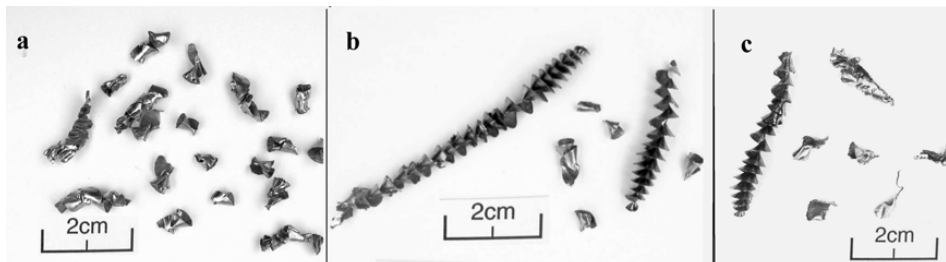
(a) The drilling chips with feed rate of 0.1 mm/rev., (b) drilling chips with feed rate of 0.15 mm/rev. and (c) with 0.2 mm/rev. A cutting speed of 50 m/min was used. Through-spindle cutting fluid supply was used
